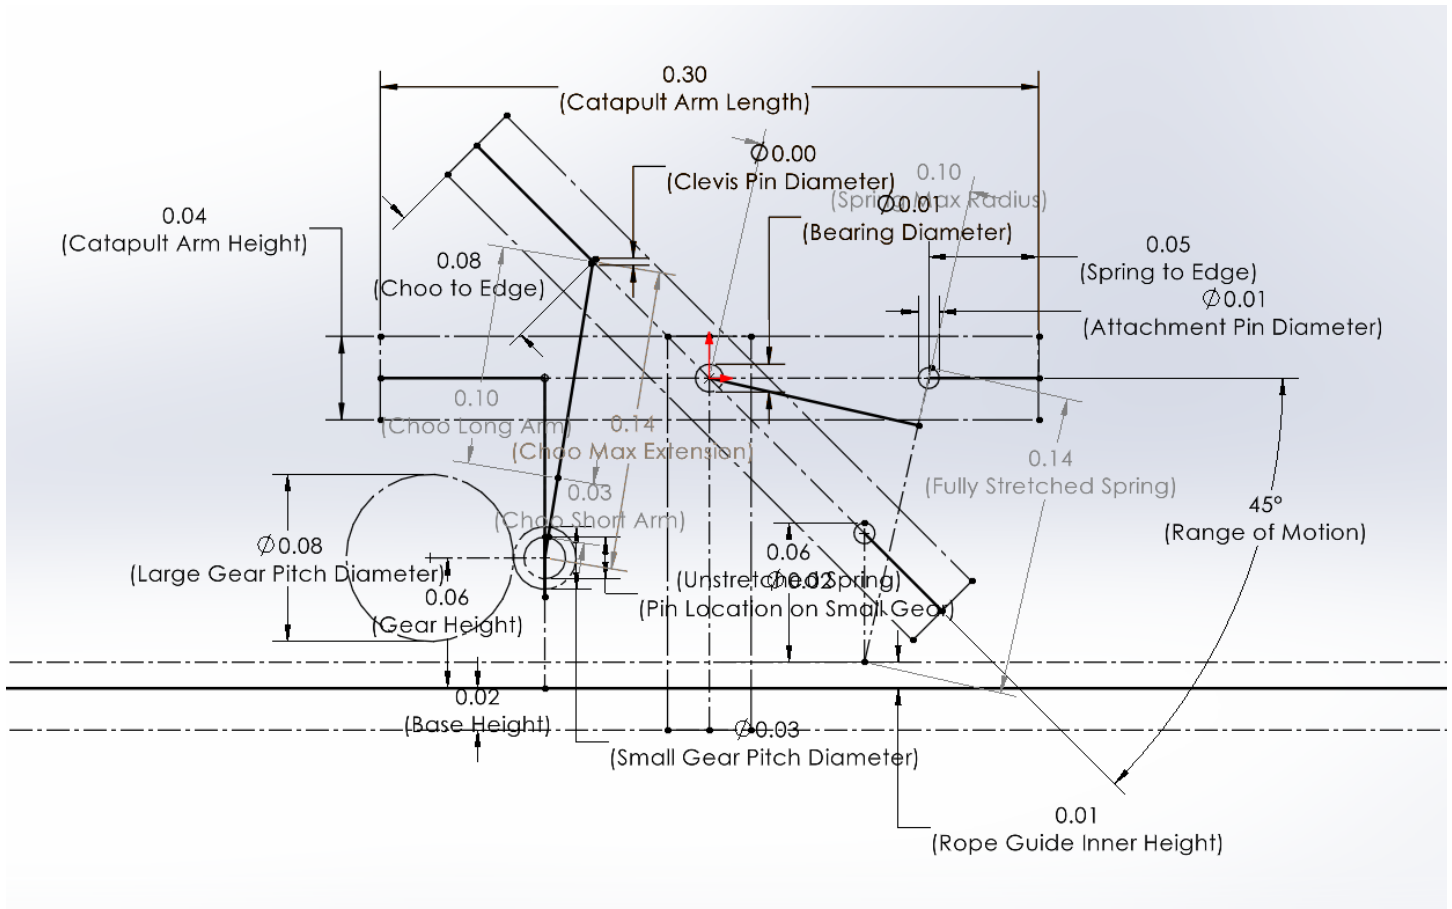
Sketch “Dimensions” on Right Plane of CAD Model Assembly.
